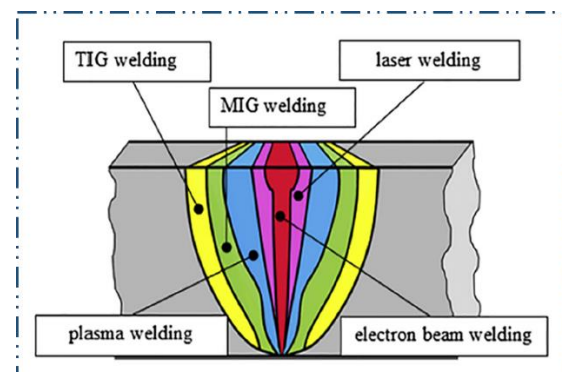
Comparison of the weld bead shape produced by fusion welding technologies [1].
